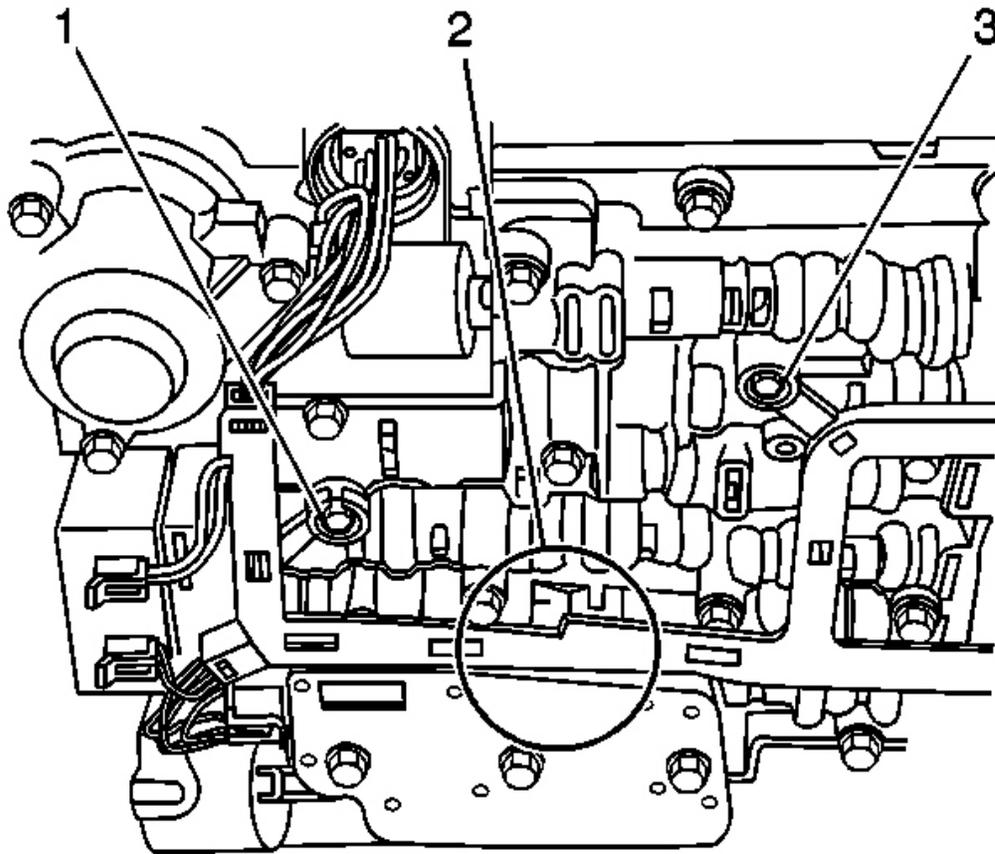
Placing Tab Between Valve Body Pressure Switch
